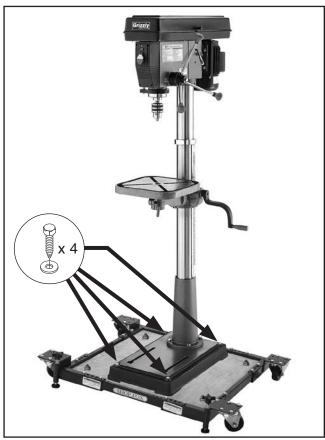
Drill press bolted to mobile base, using lag bolts and flat washers.
